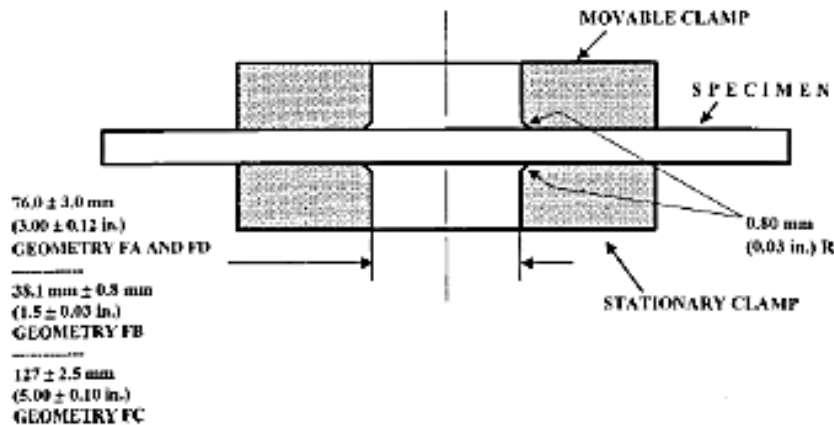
Support Plate/Specimen/Clamp Configuration for Geometries FA, FB, FC, and FD
